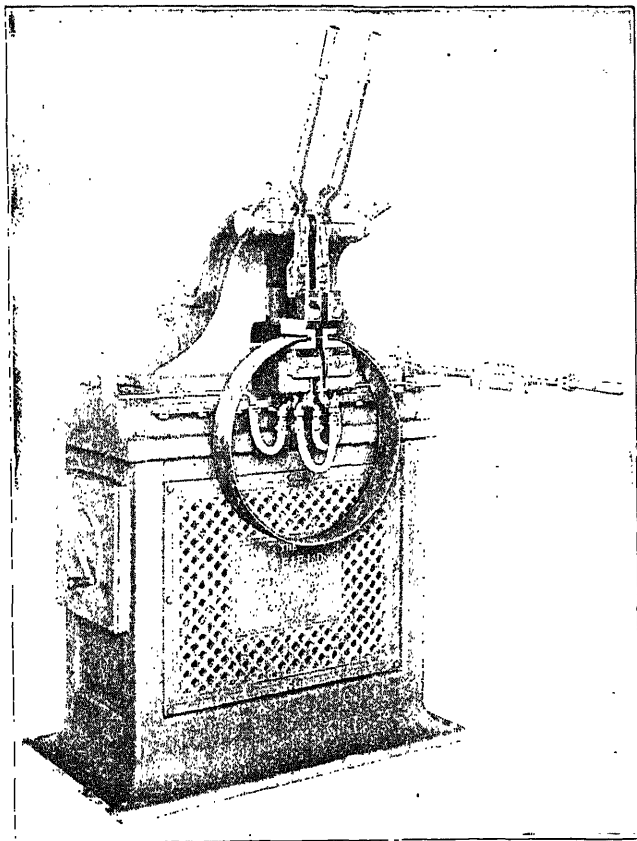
A General Purpose Butt-Welding Machine.
